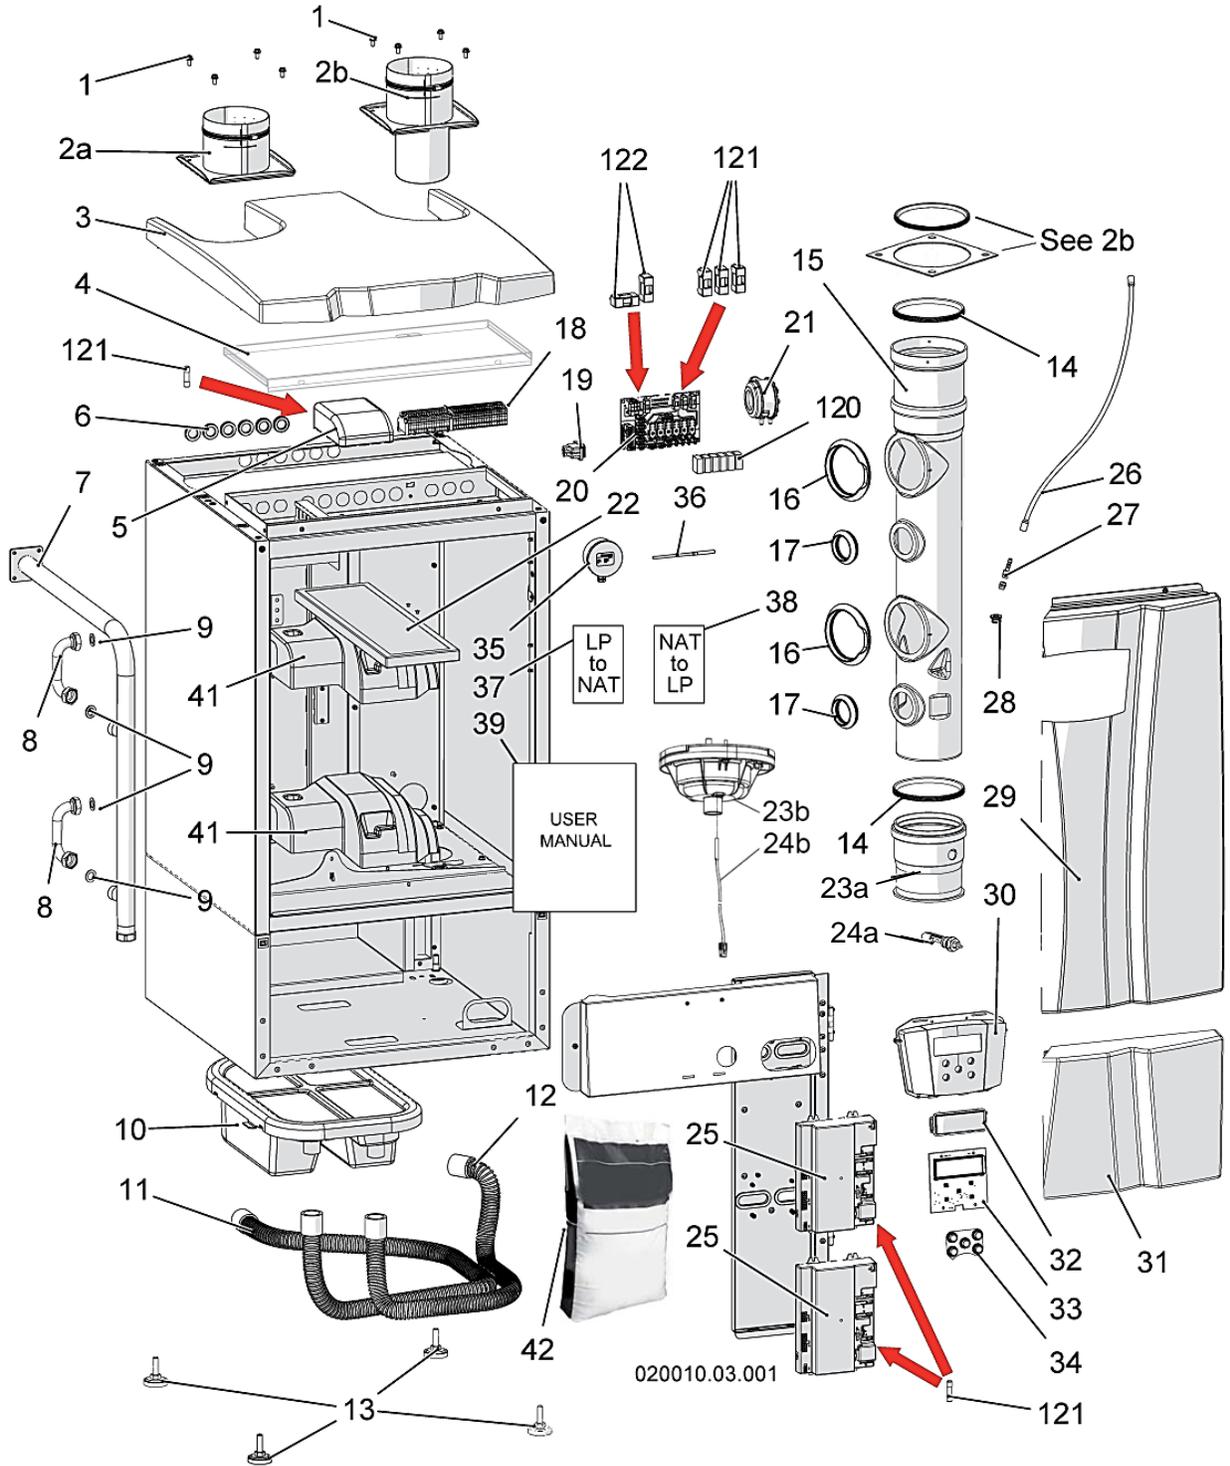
AM 399/500 General Assembly Parts Drawing (1 of 2)
